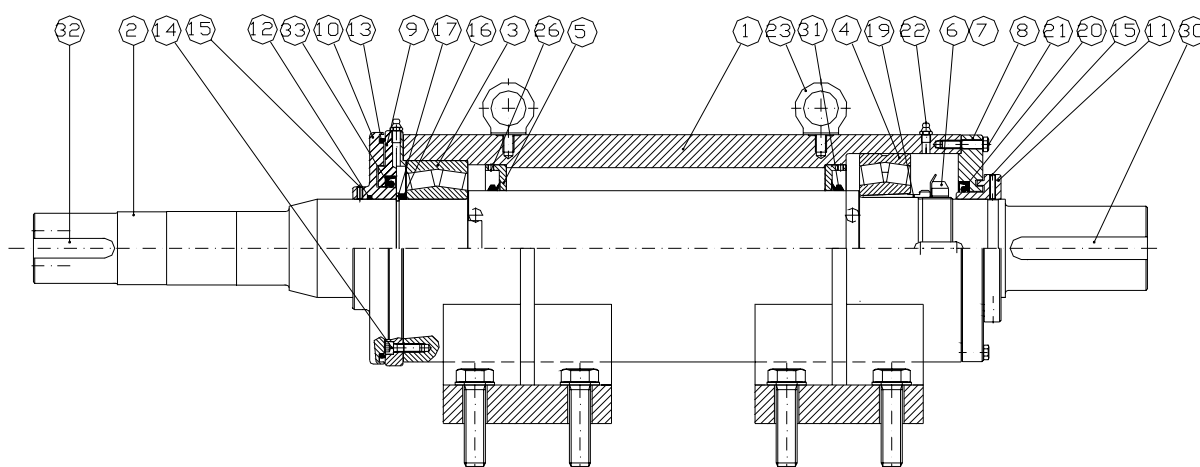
Replacing Bearings and Seals, STOA008688 (STOA004415)
